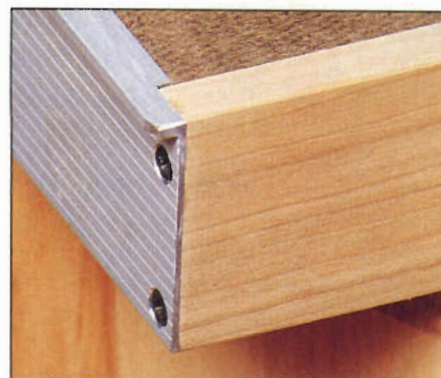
Photo C: Cut away flanges on the ends of the drawer slides to accept drawer fronts/back. File tips round to smooth their operation.
